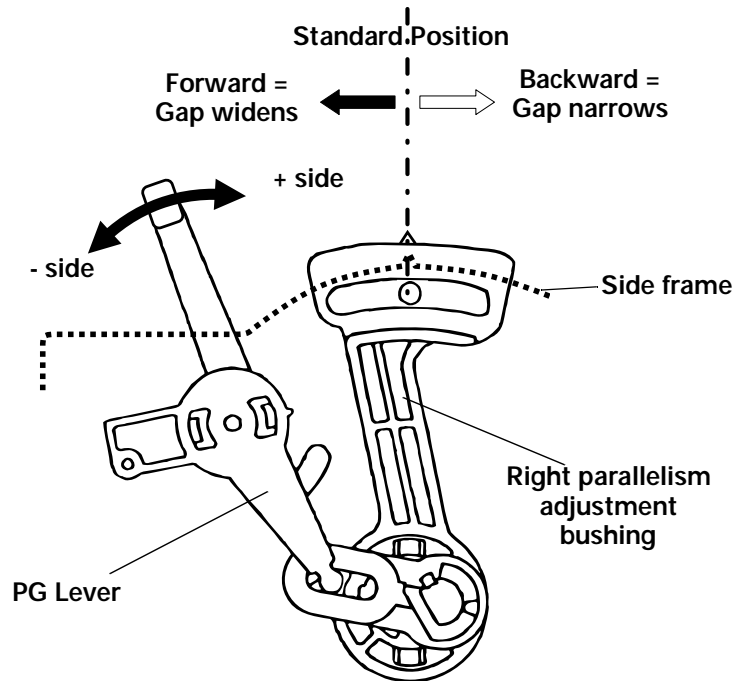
Paper Gap Adjustment -Adjusting Method
